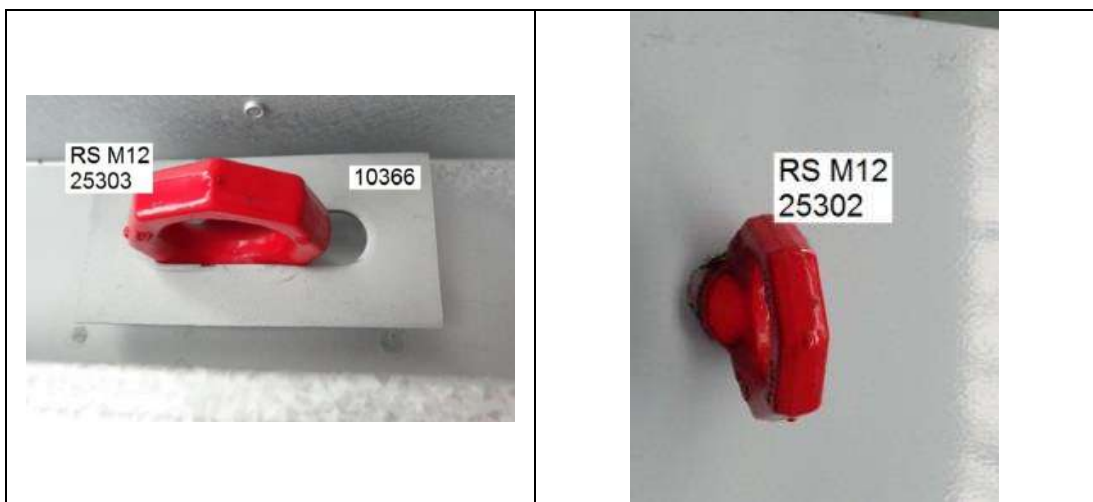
Wall panel (Lifting eye bolt (25303) / safety plate (10366))
